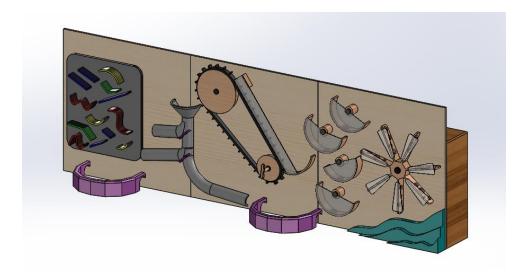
Our first design of the ball wall created in CAD. All sections of the wall are connected as one piece and the components are non-modular.
